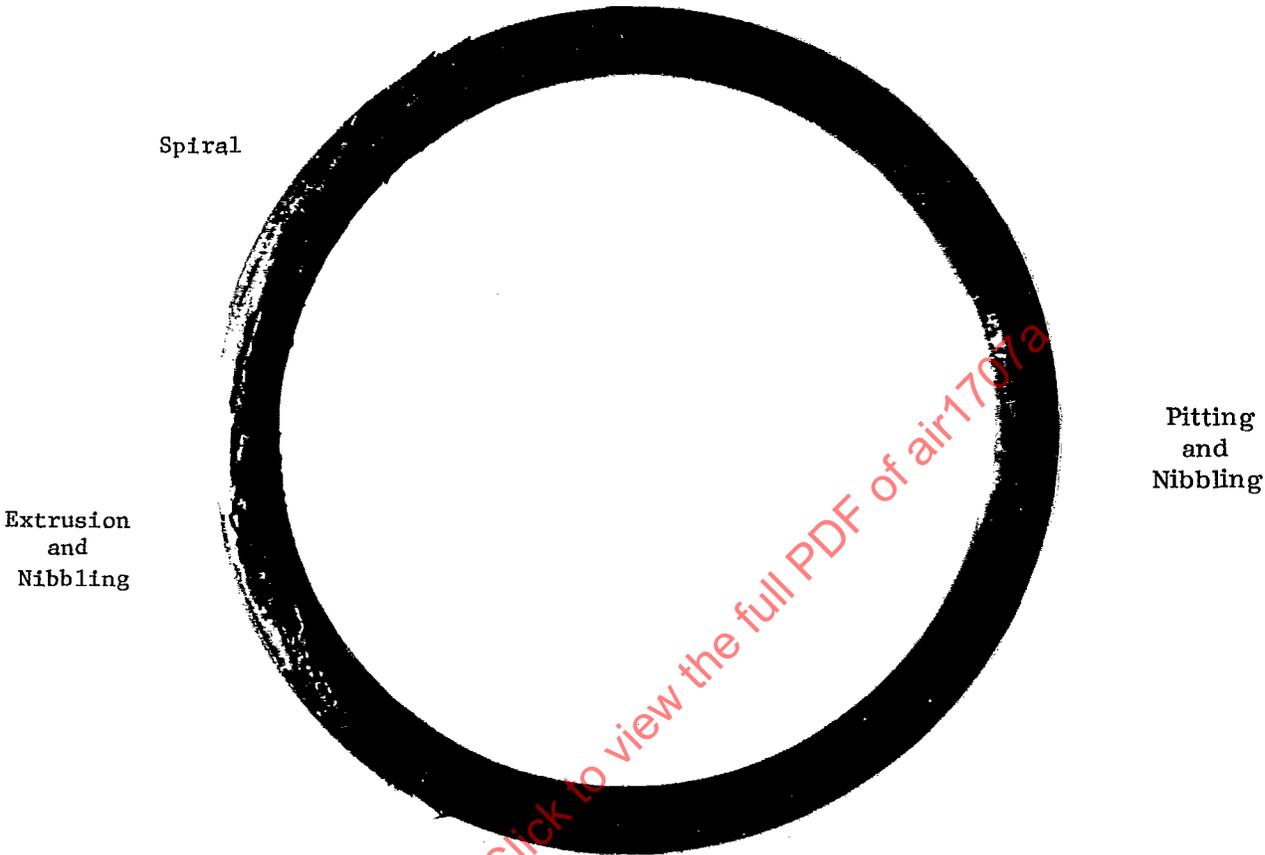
Nibbling, Extrusion, Pitting, and Spiral Failure
